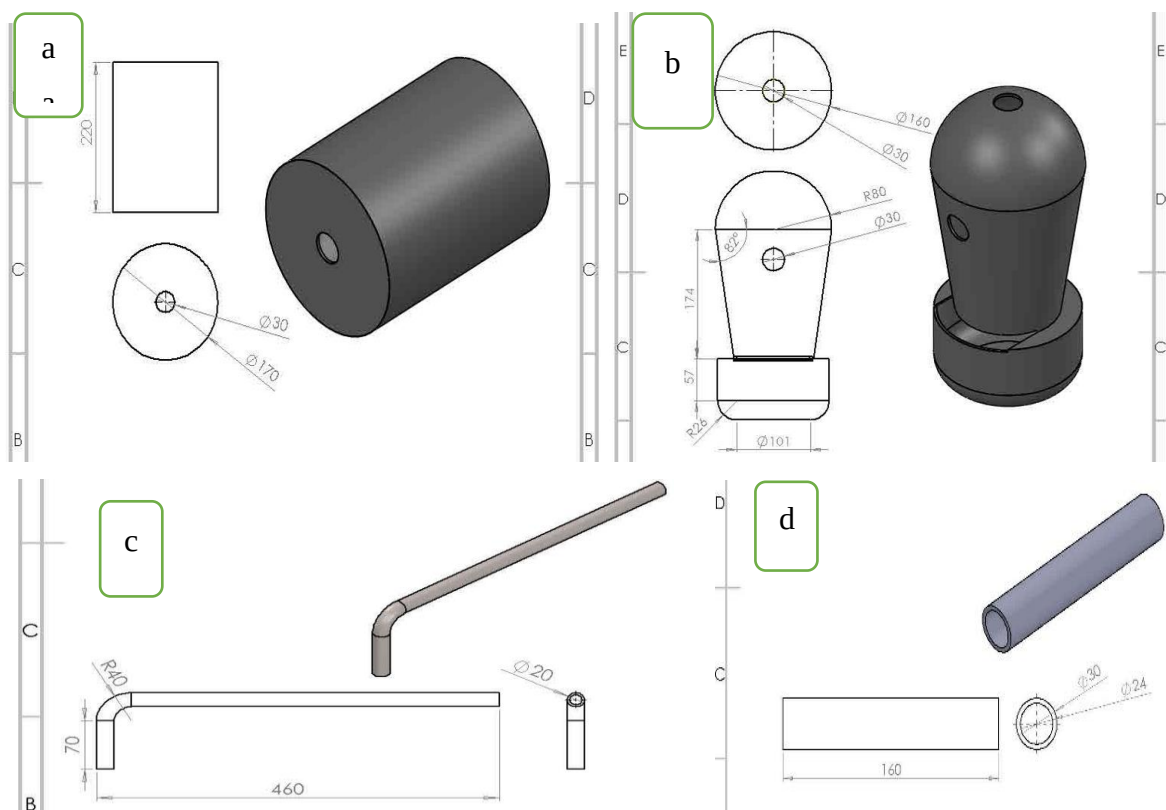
Components of gasifier (a)suction fan, (b) cyclone separator, (c) preheater pipe line, (d) Fan outlet pipe line
